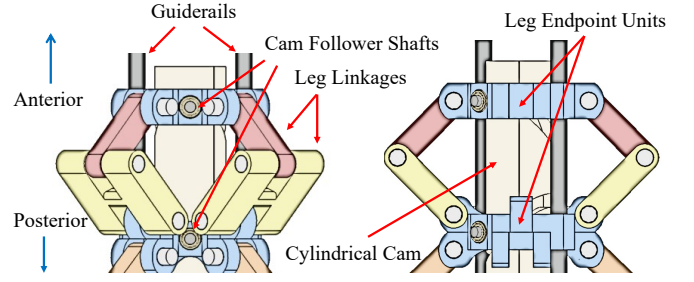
CAD model side views of a single body segment with component nomenclature. The right-side image is axially rotated  $45^\circ$ , with one set of leg linkages removed.
